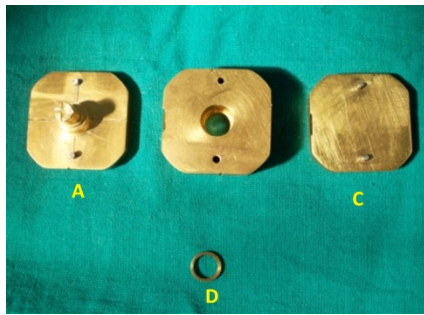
Parts of stainless steel die assembly used for fabrication of wax patterns. A : Die, B : former, C : base, and D : spacer.
